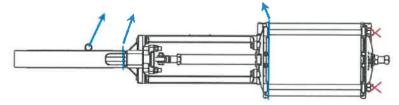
, Knife Gate Valve with Pneumatic Cylinder Actuator, Horizontal Lifting
